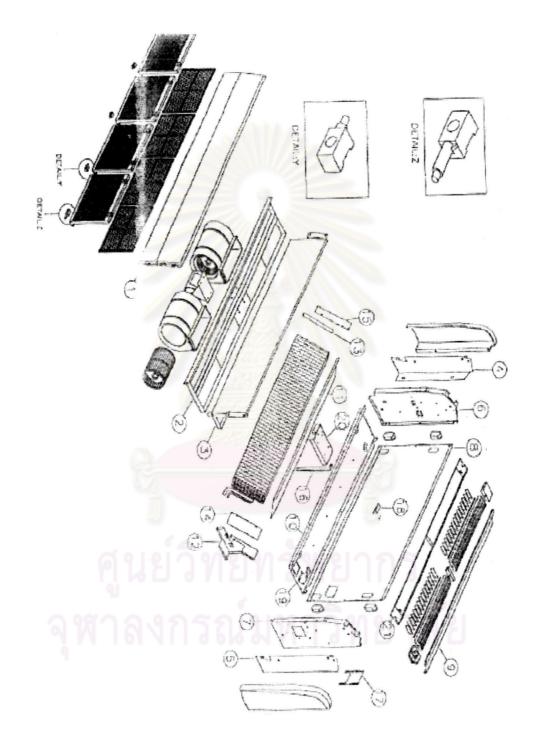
; Design parts of fan coil unit of SFJ-16 model
